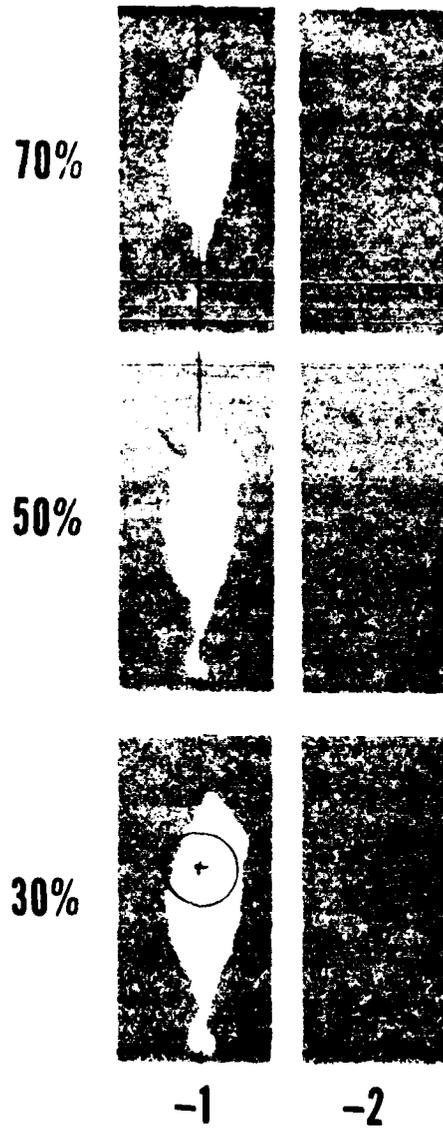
C-scan recording of weld overlay motor body 110
